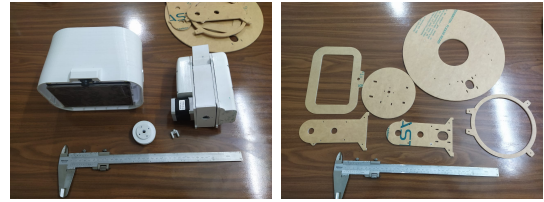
3D printed and Laser cut parts of the Robot Head and Neck
